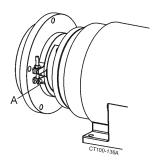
Clamp Impeller/Backplate to Motor Adapter
